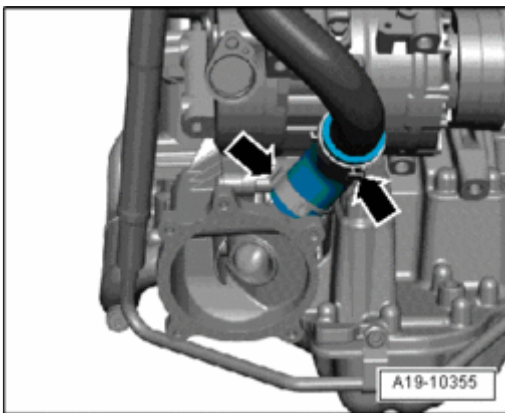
Removing Coolant Hose And Bringing Coolant Pipe Upward
